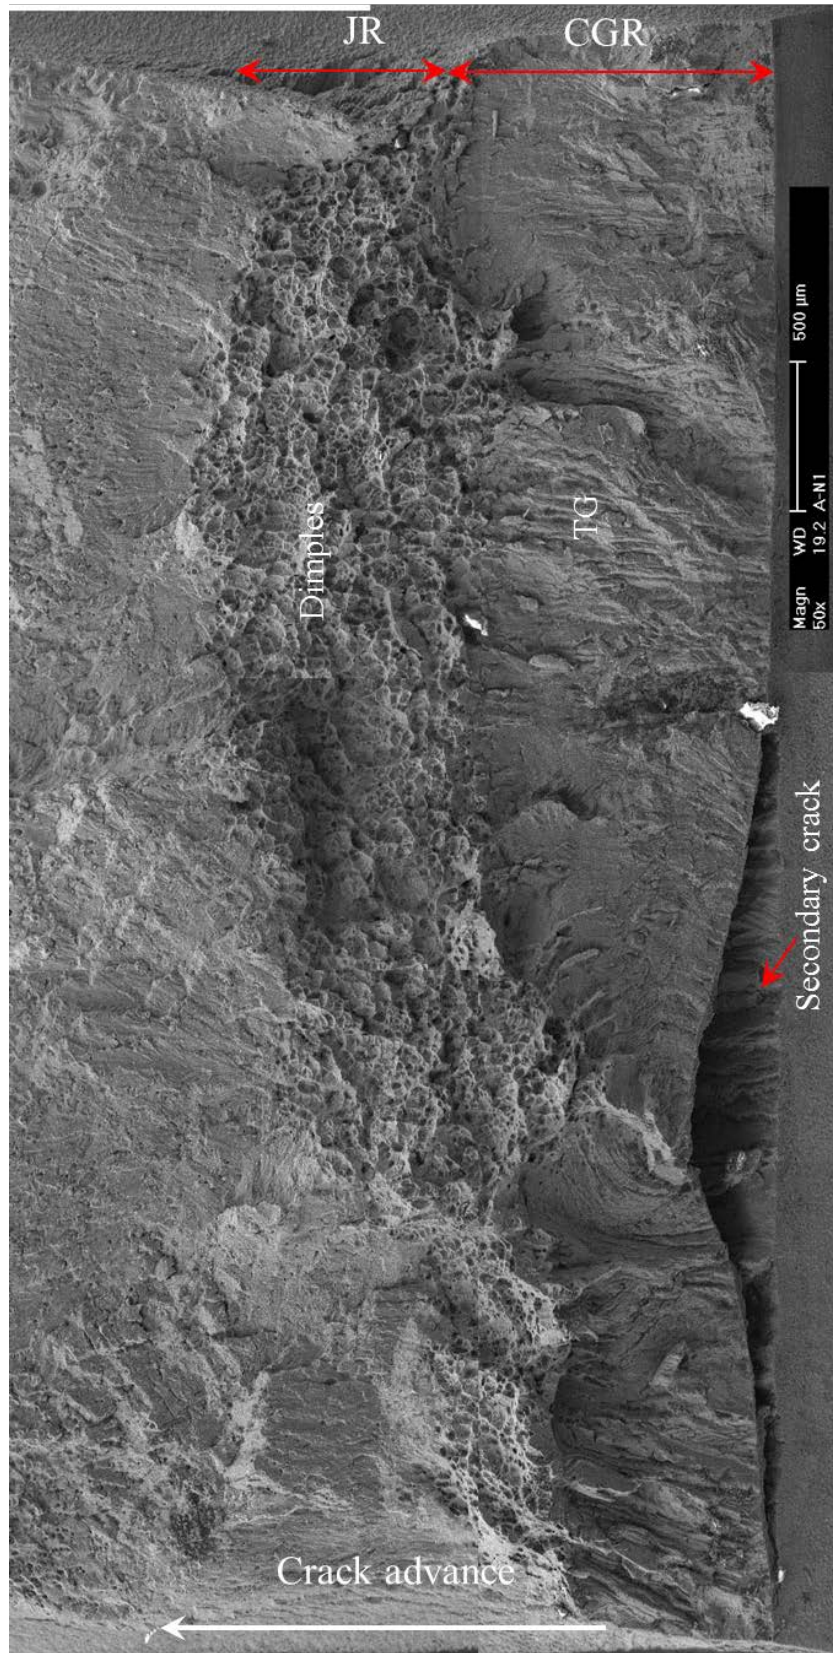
Fracture surface of specimen A-N1 tested in low-DO high-purity water.
